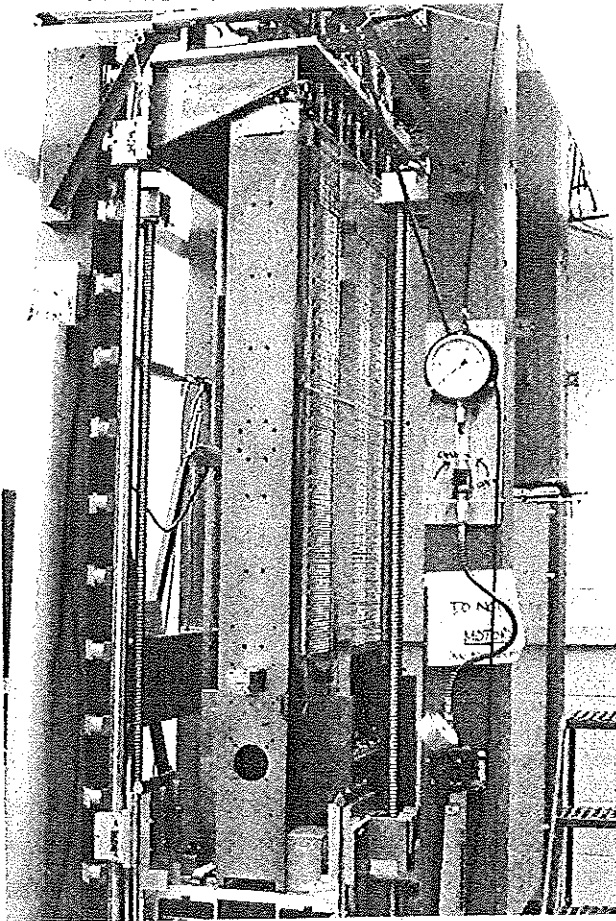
The stacking machine, assembling the first FCAL prototype module, in York (Canada).
